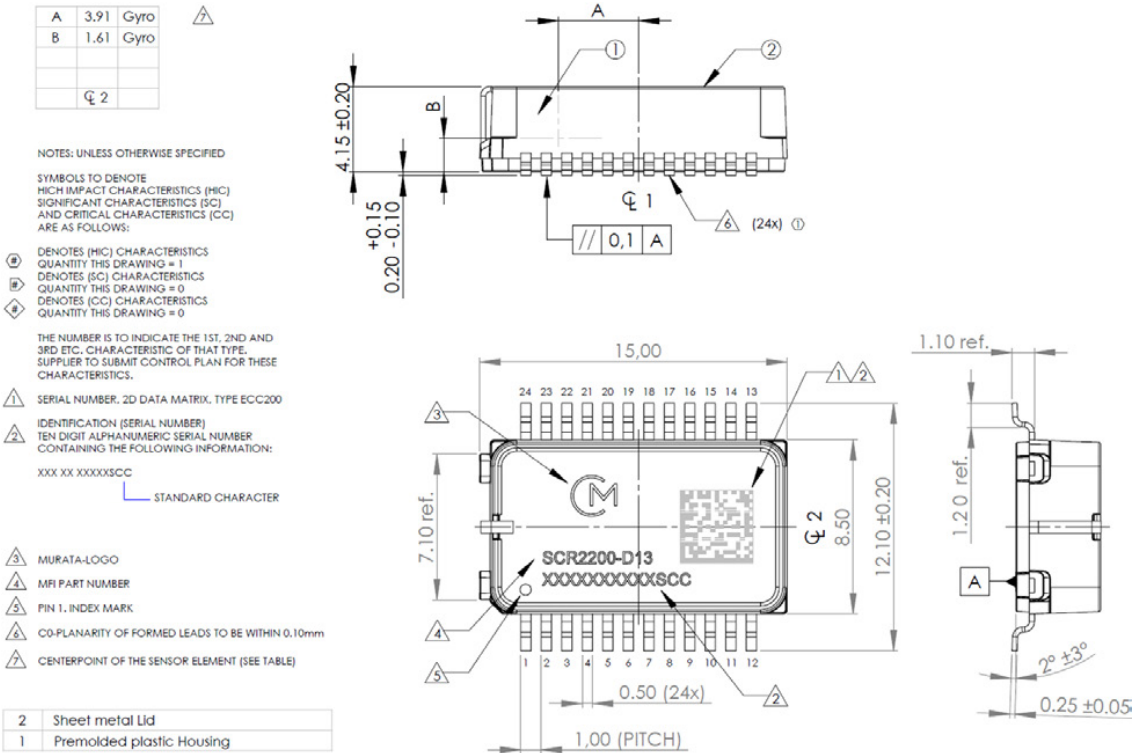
Package outline. The tolerances are according to ISO2768-f (see Table 9).
